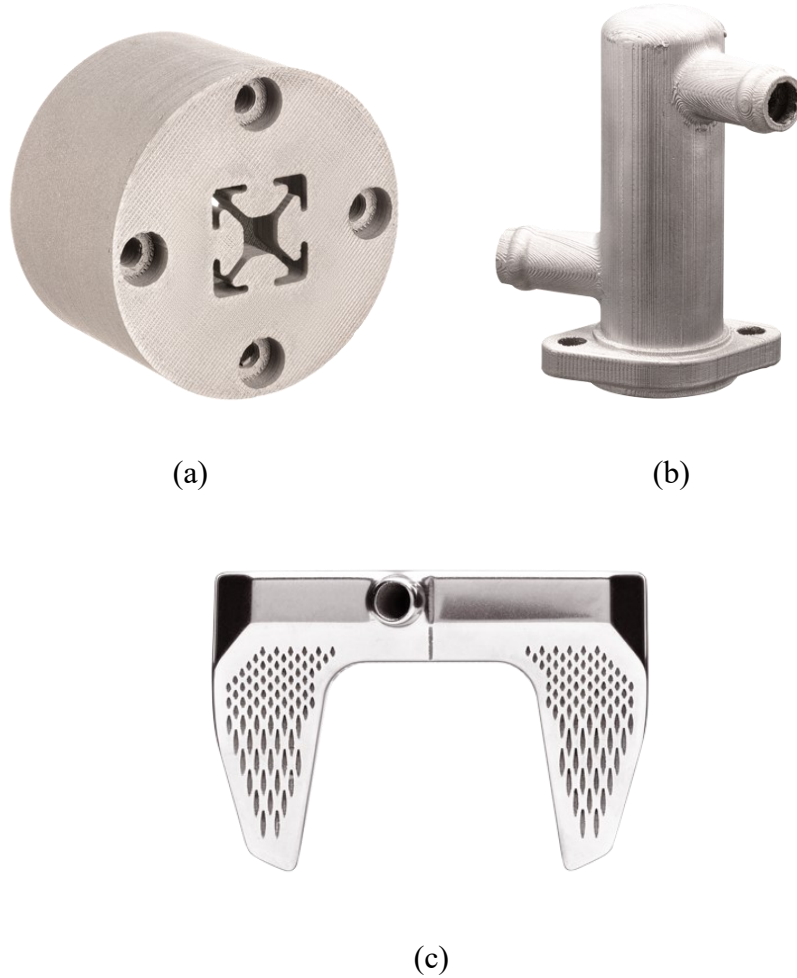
Several examples of metal parts produced via BJP. (a) An extrusion die used in plastic extrusion, shown here composed of H13 tool steel [43]. (b) A thermostat housing replacement for a vintage Mercedes Benz engine, shown here composed of 316L stainless steel [44]. (c) A custom-made putter head for golf clubs, shown here made from 17-4 PH stainless steel [45].
